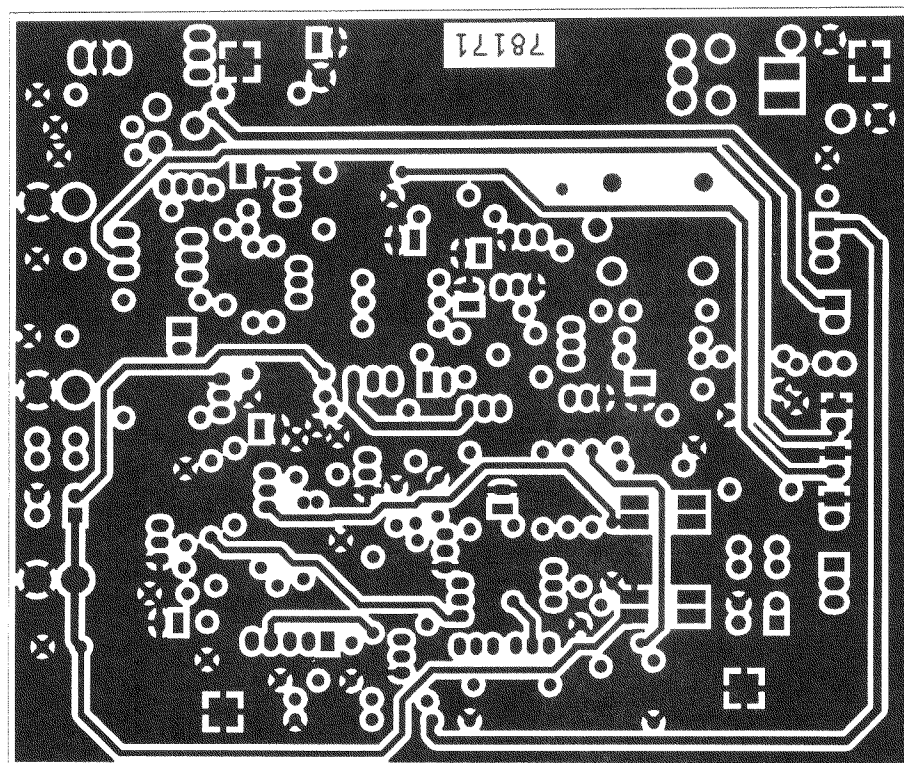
QSK BOARD COMPONENT LAYOUT TOP VIEW
